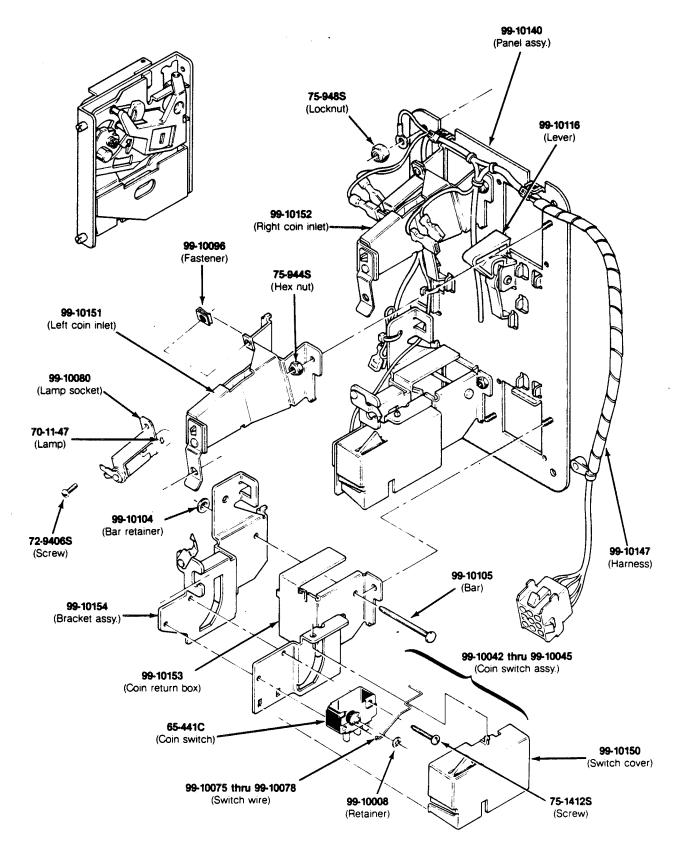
American-Made Coin Door Assembly 171027-001 A
